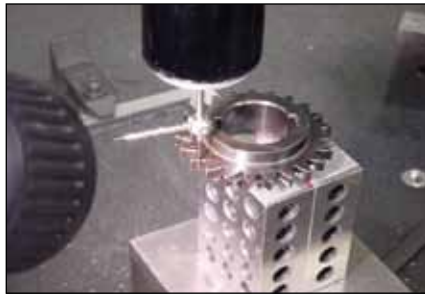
(Revised)—CMM measurement of asymmetric gear.
